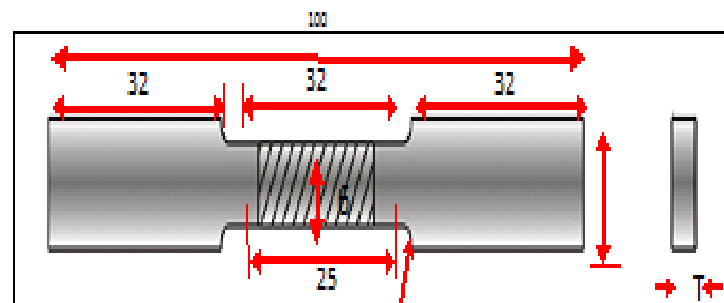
ASTM sub-size sample for tensile test. (dimensions are in mm)
